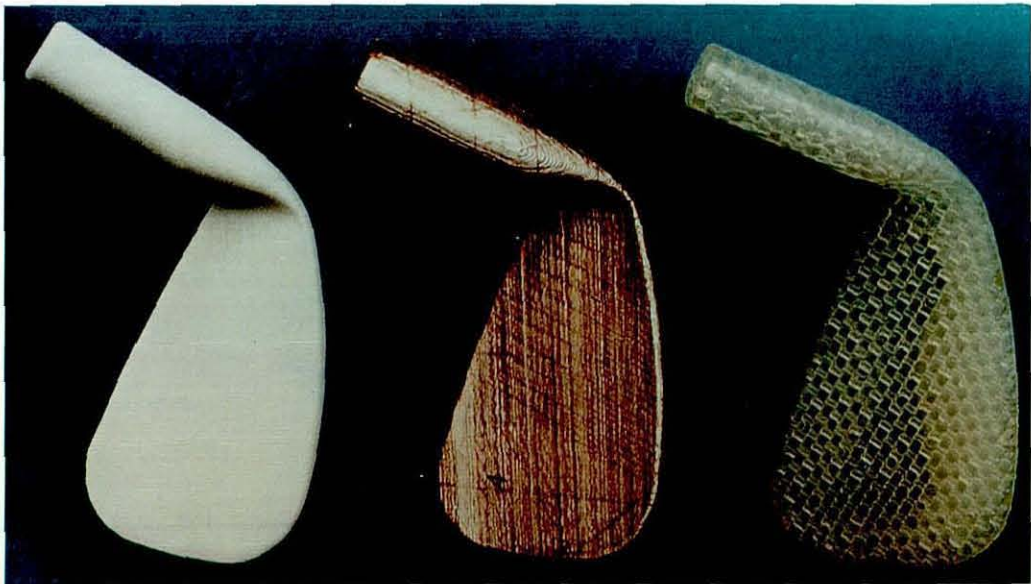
EFFM Design Produced Using Rapid Prototyping Techniques.
